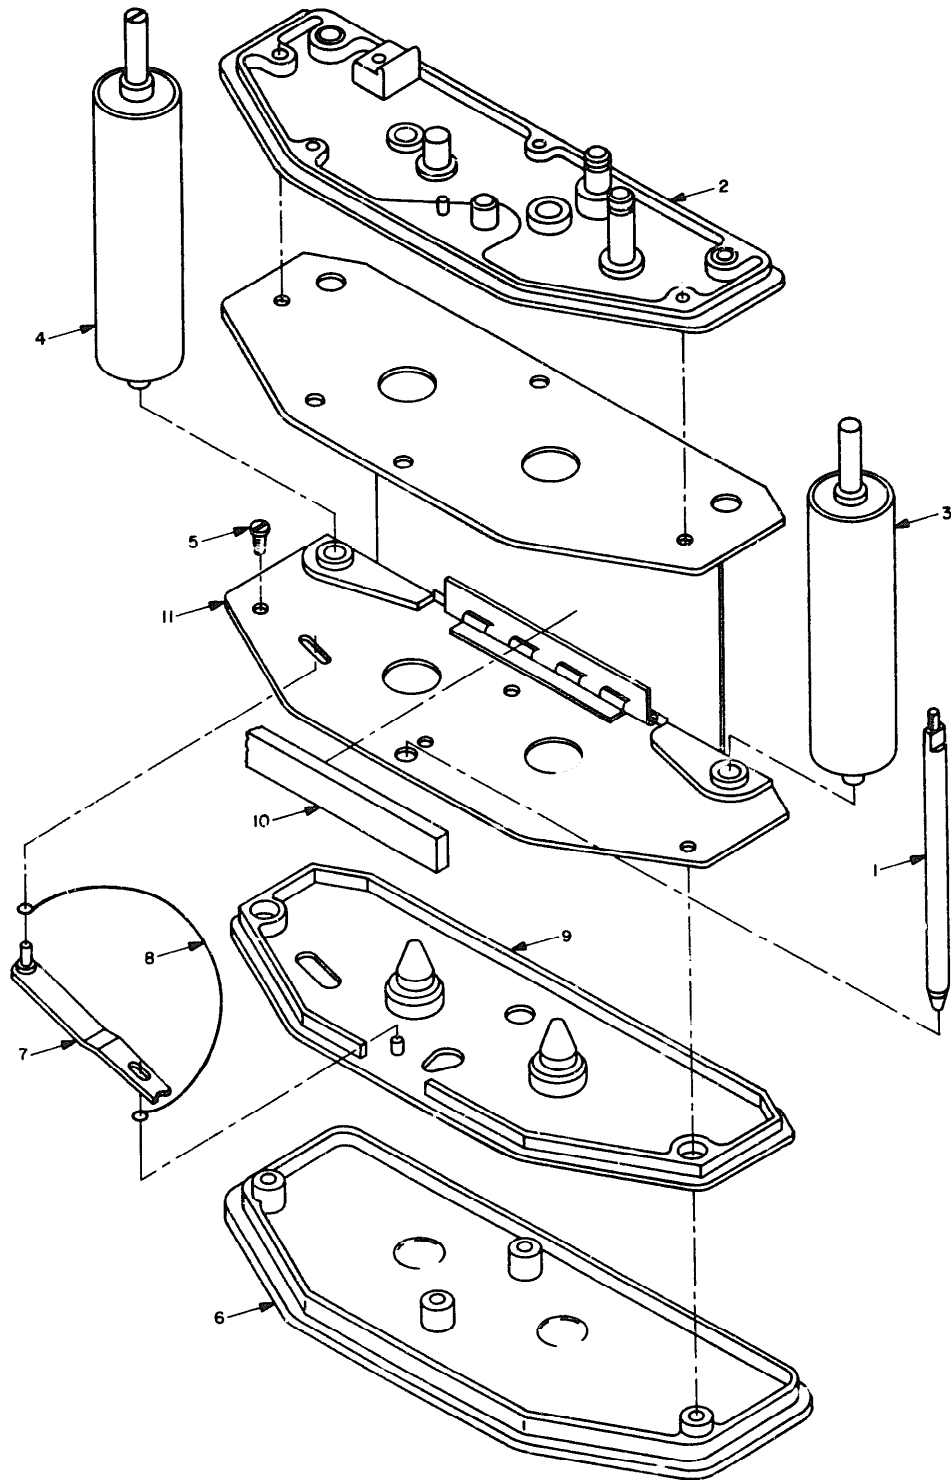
RH/50 Carriage complete, disassembly (stage 1), exploded view.
